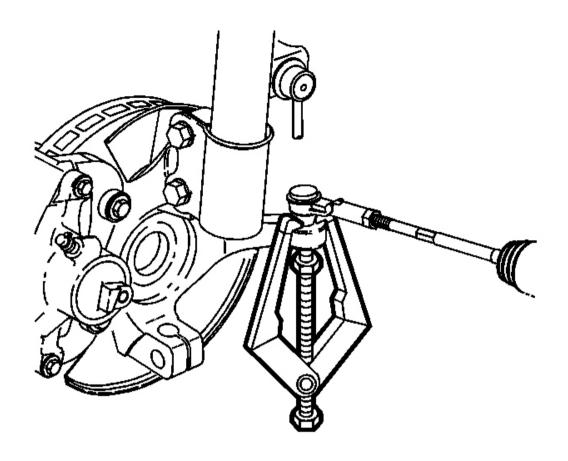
Separating Tie Rod From Knuckle Using SA91100C Courtesy of GENERAL MOTORS CORP.
